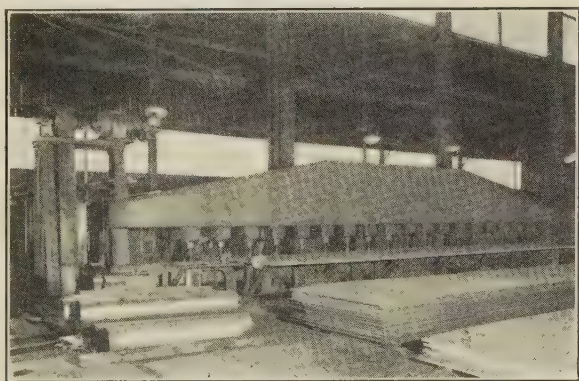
36-FT. PLATE PLANER WITH TWO PLATES IN POSITION FOR MACHINING BEVEL ON 30-FT. SIDE
